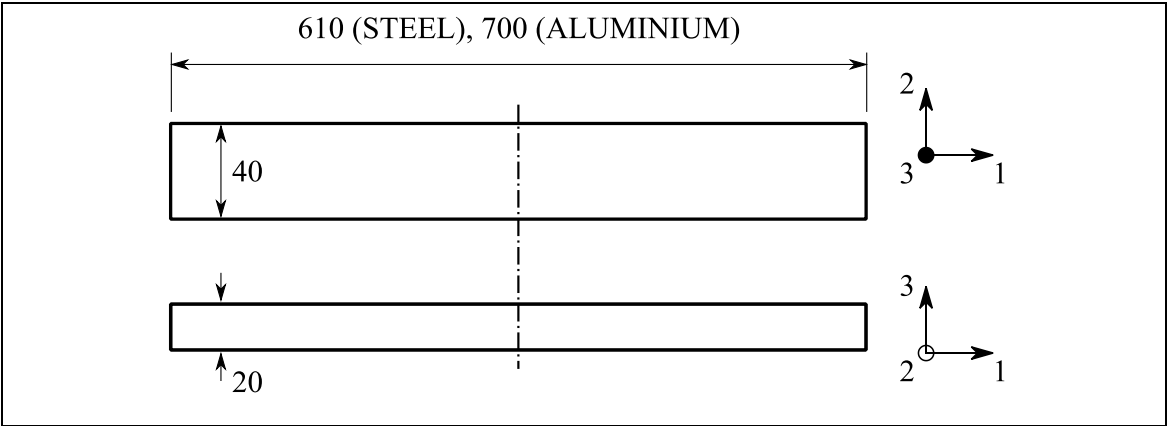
Overall geometry of the beam specimens. Dimensions are in millimetres.
